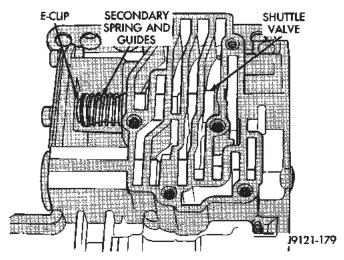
Shuttle Valve E-Clip And Secondary Spring
